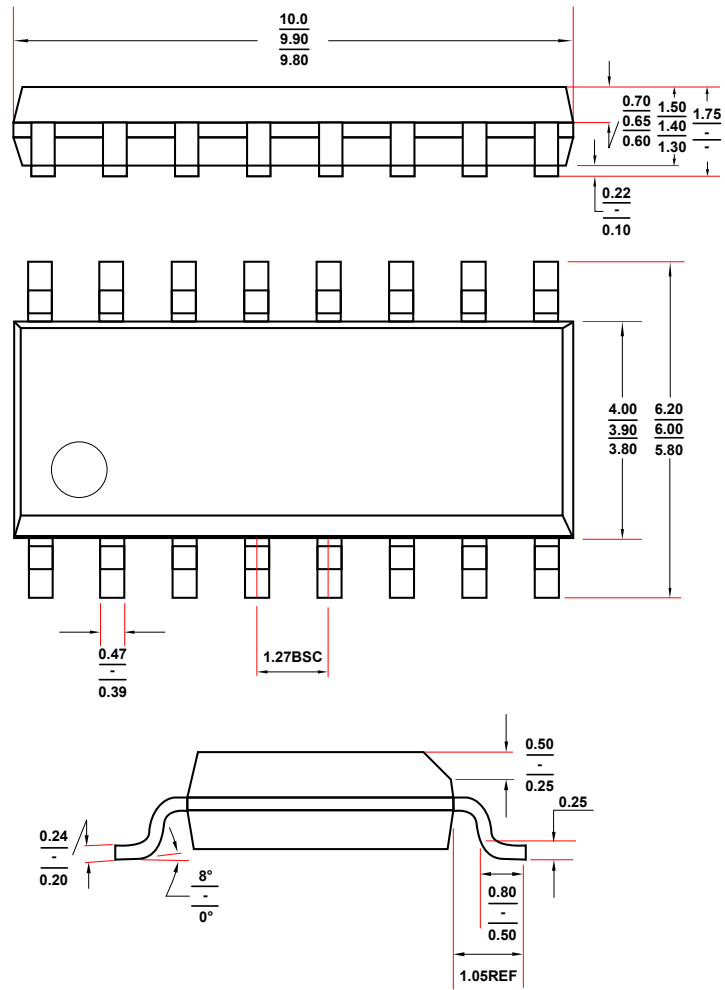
16-Lead SOIC Package Dimensions Shown in Millimeters
